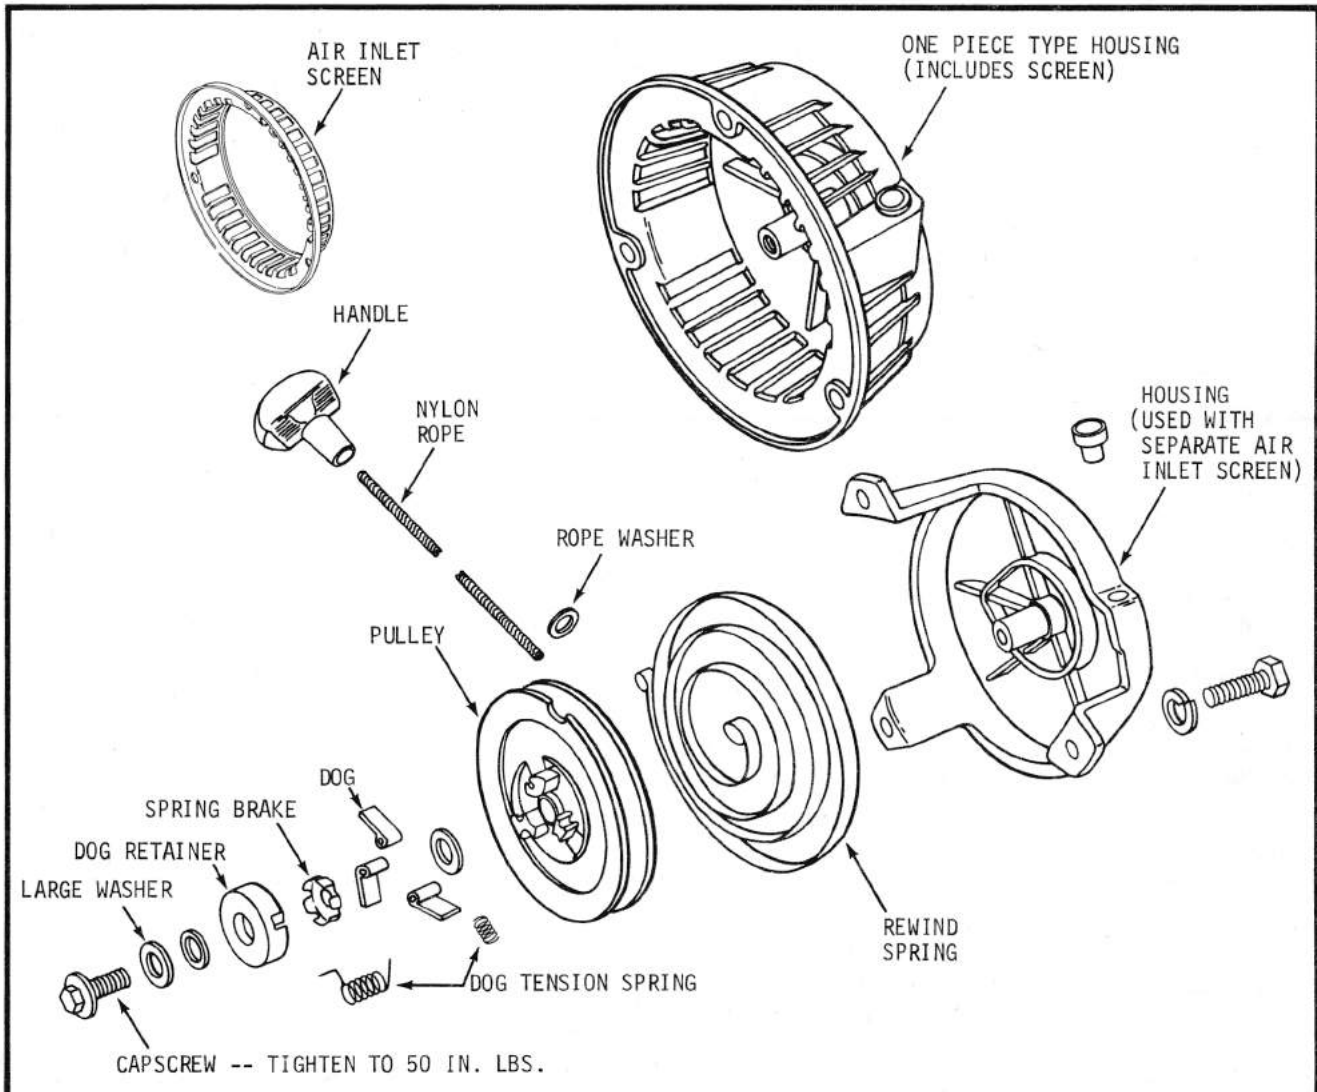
EXPLODED VIEW: RETRACTABLE STARTERS
